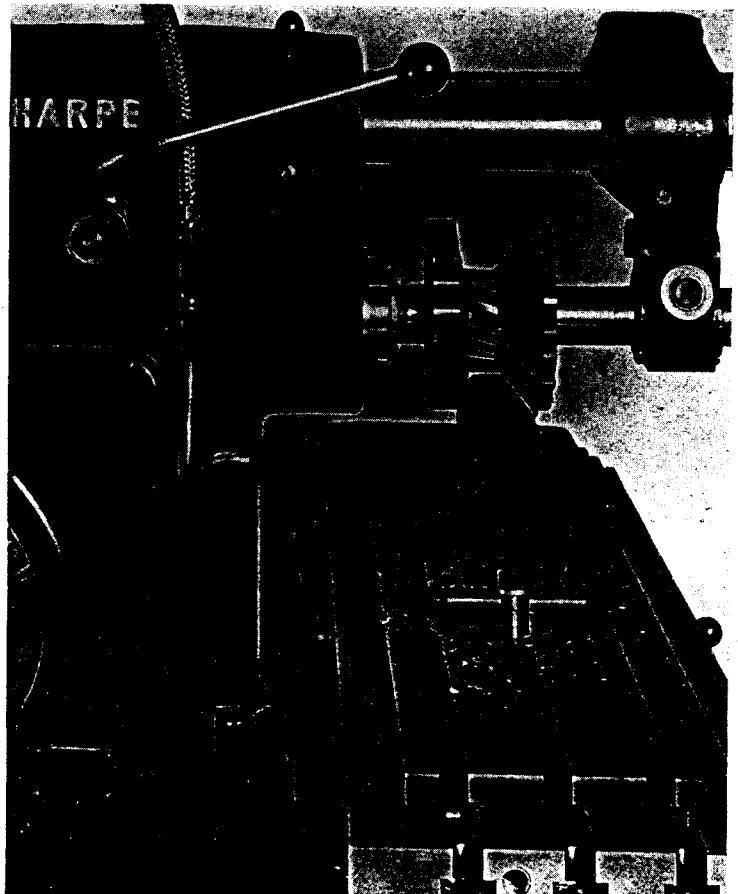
Milling a form using a gang of three interlocking cutters. Note how the set-back face of the machine column allows the cutters to be mounted close to the spindle nose of the machine. Since arbor deflection (caused by the pressure of the cutters on the work) decreases rapidly as the cutters are brought closer to the spindle nose, the cutters should always be located as close to the spindle as possible in order to secure maximum cutter rigidity.
